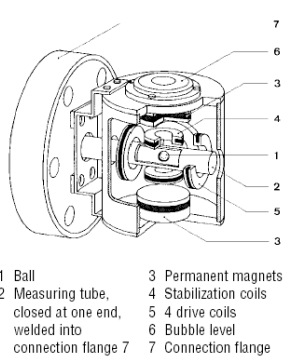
Cross-section of the gauge head of a VISCovac VM 212 spinning rotor gauge (SRG)
